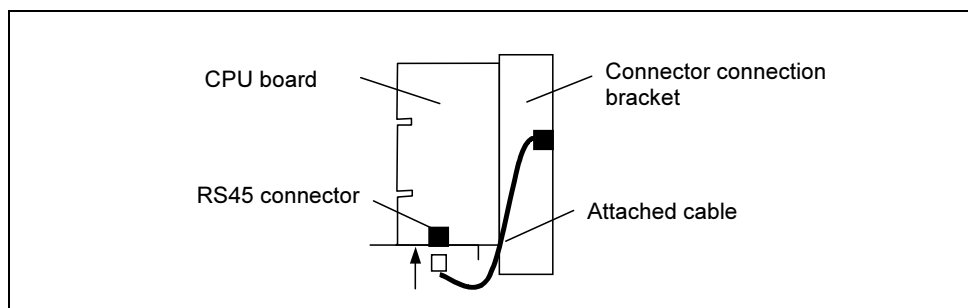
Ethernet cable connection for the AX controller (1)
